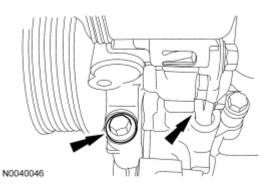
Locating Power Steering Pump And Lower Bolt Courtesy of FORD MOTOR CO.
